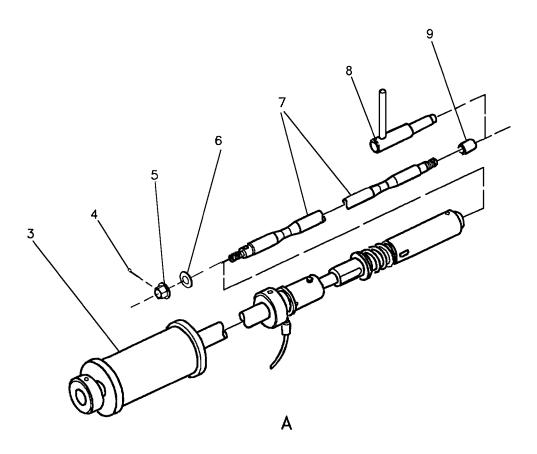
Outer Wing Removal and Installation (Sheet 2)
